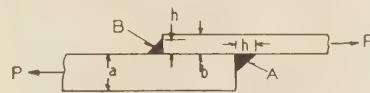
FILLET-WELDED JOINT BETWEEN PLATES OF UNEQUAL THICKNESS
